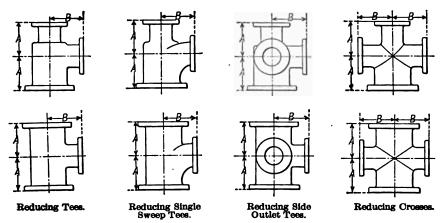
STANDARD AND EXTRA HEAVY REDUCING FLANGED FITTINGS
